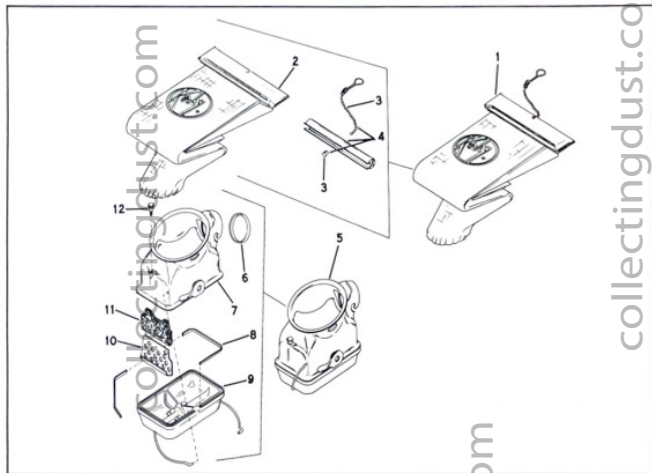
Emtor Group, exploded view (Models 505/515)
